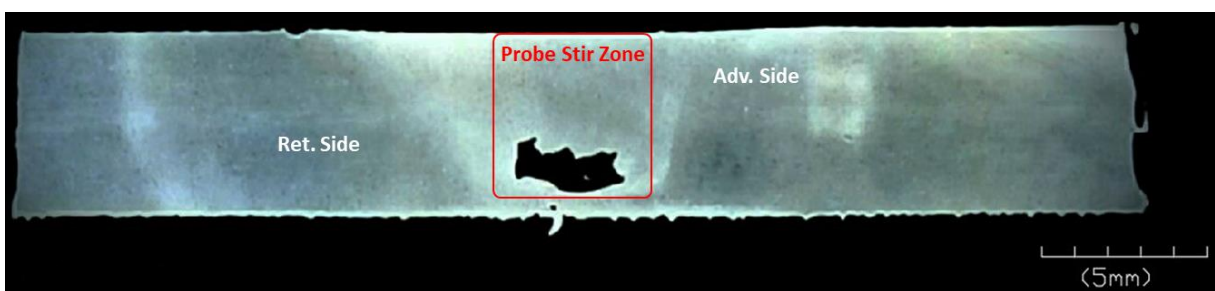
Position of the internal cavity formed while performing weld D5
